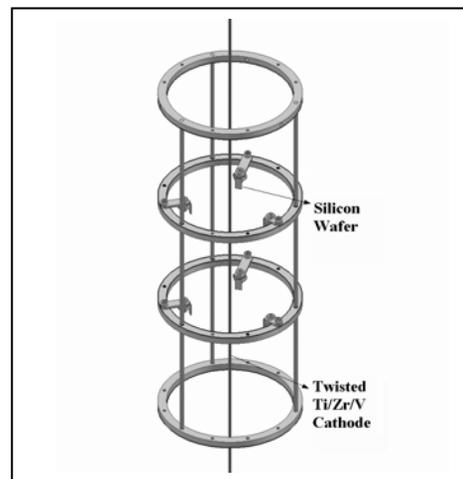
Silicon wafer sample holder for NEG film deposition. The assembly is mounted to the SST tube.
